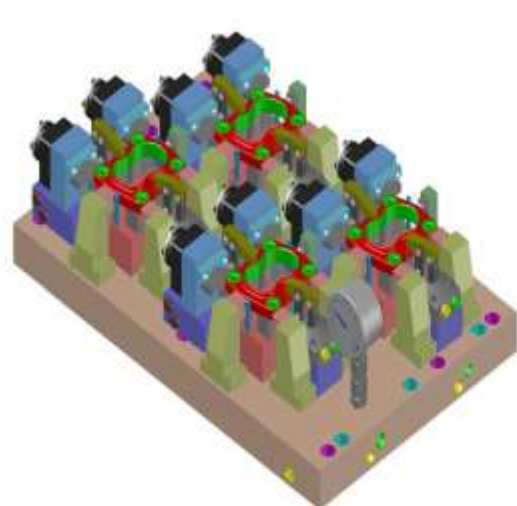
3D view of 16-cylinder hydraulic fixture.
